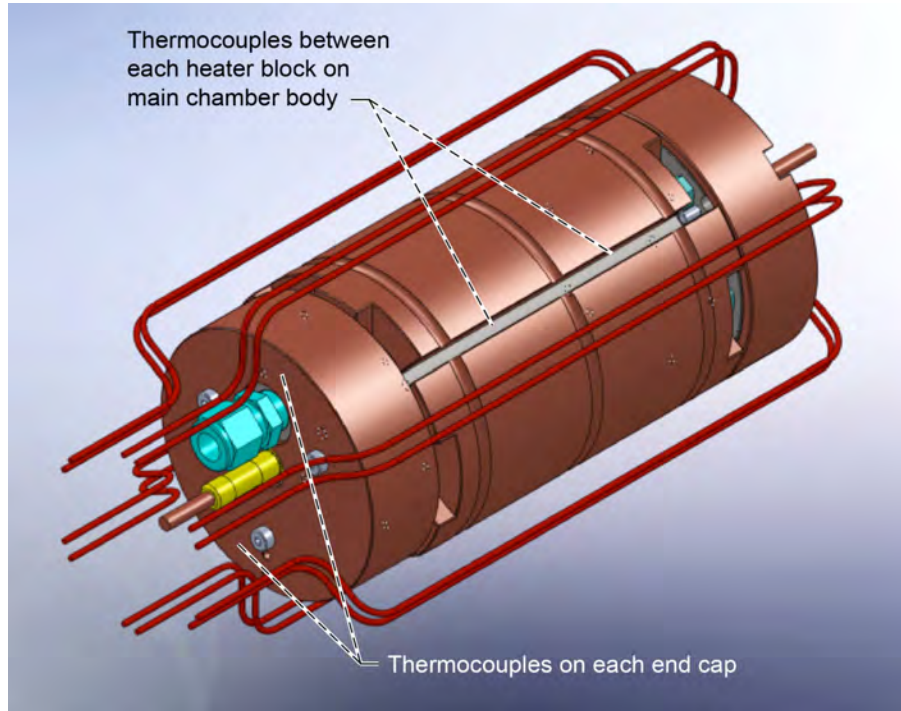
Reactor body temperature measurement using type-K thermocouples.
